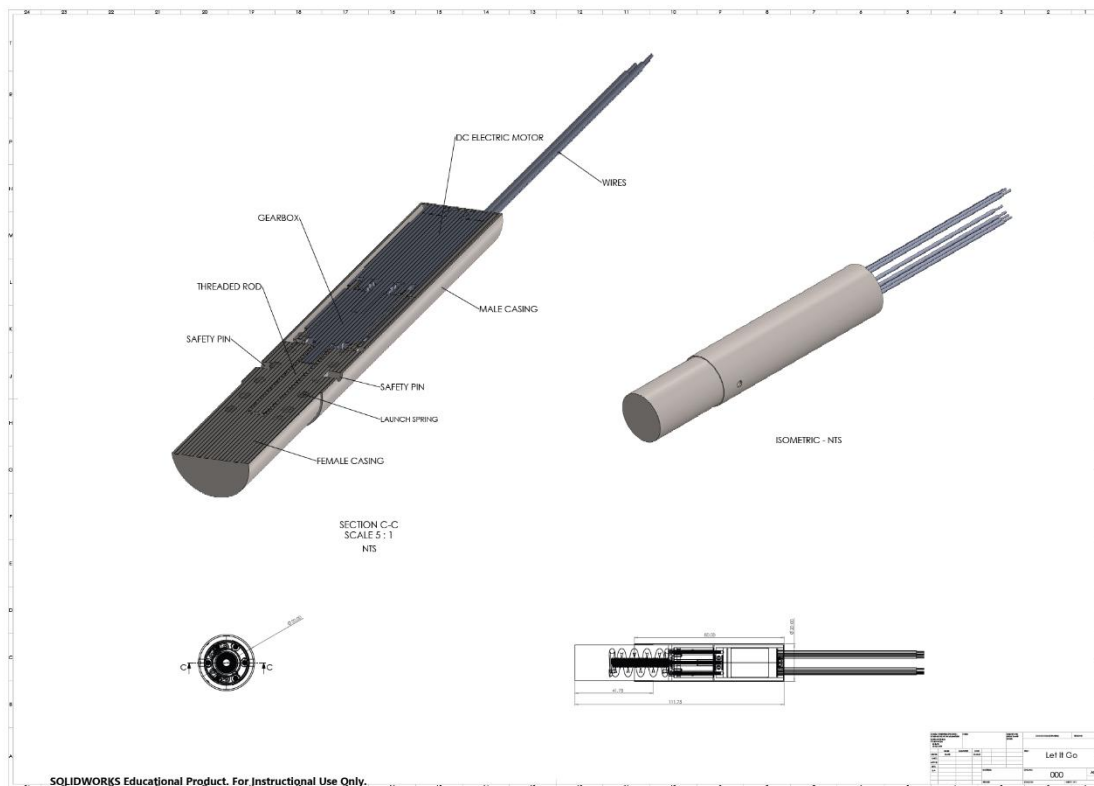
THE DESIGN, ISOMETRIC VIEW
